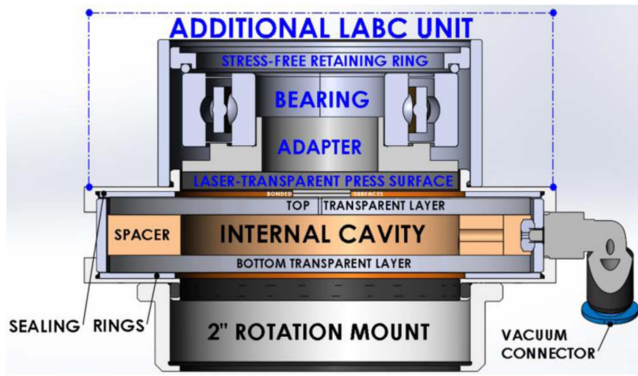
Explanatory drawing for the proposed vacuum sample holder design: The simplified cross-section.
